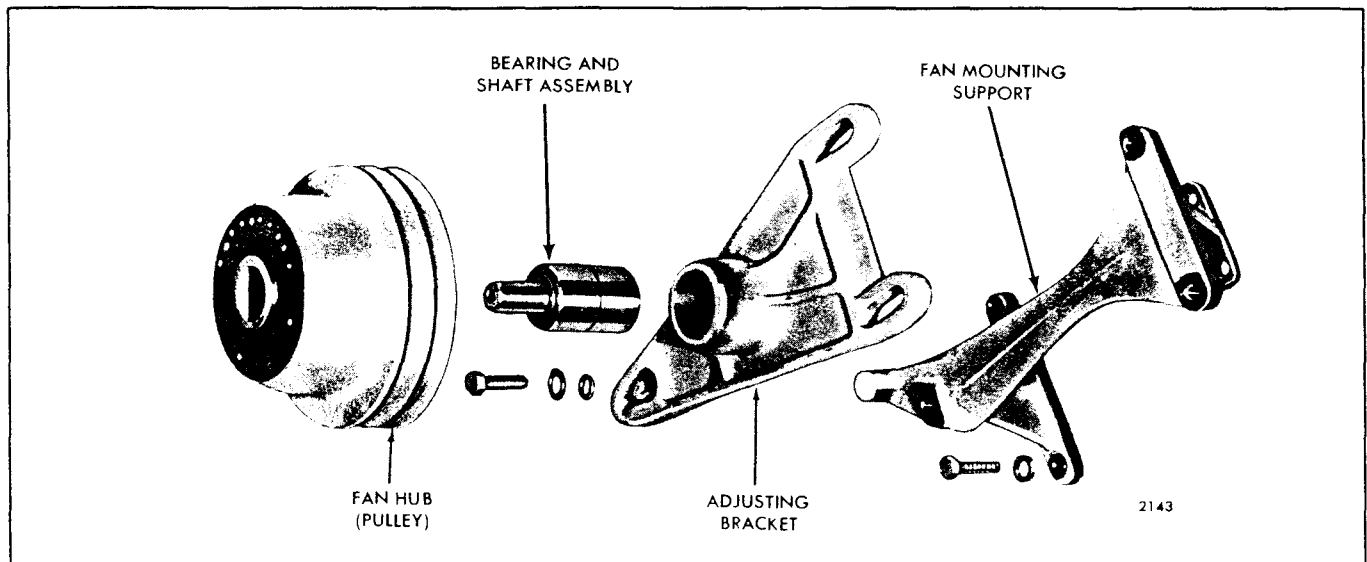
Typical Fan Hub and Adjusting Bracket Details and Relative Location of Parts (In-Line Engine)
